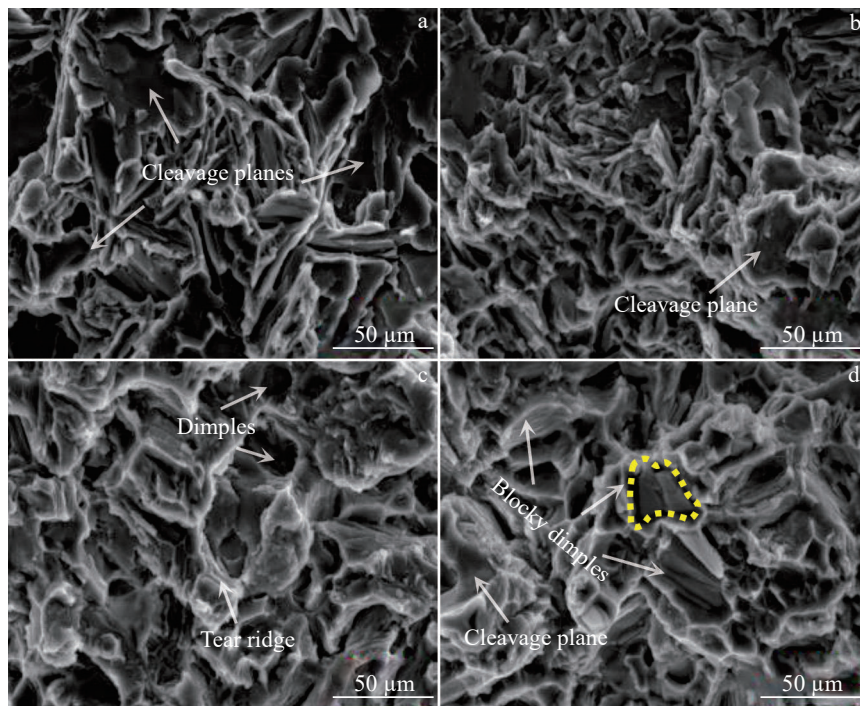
Tensile fracture surfaces of 0# (a), 1# (b), 2# (c), and 7# (d) samples
